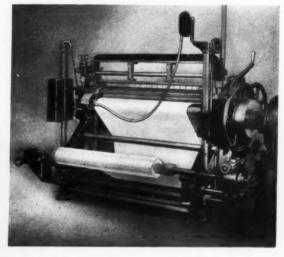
(Left)—Flexible shaft construction showing how pitch of windings alternates and size of wire is graduated, increasing with each succeeding layer. Fig. 2—(Above)—Shaft provides a flexible drive for this yardage counter on a textile machine
